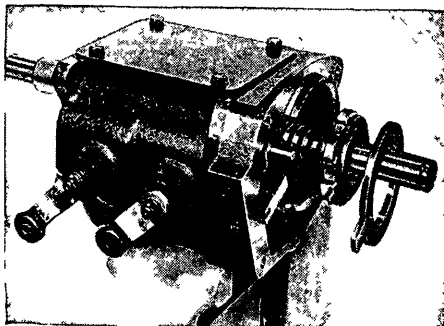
After releasing snap ring from adapter plate, remove sun gear cover plate, blocker and solenoid pawl
